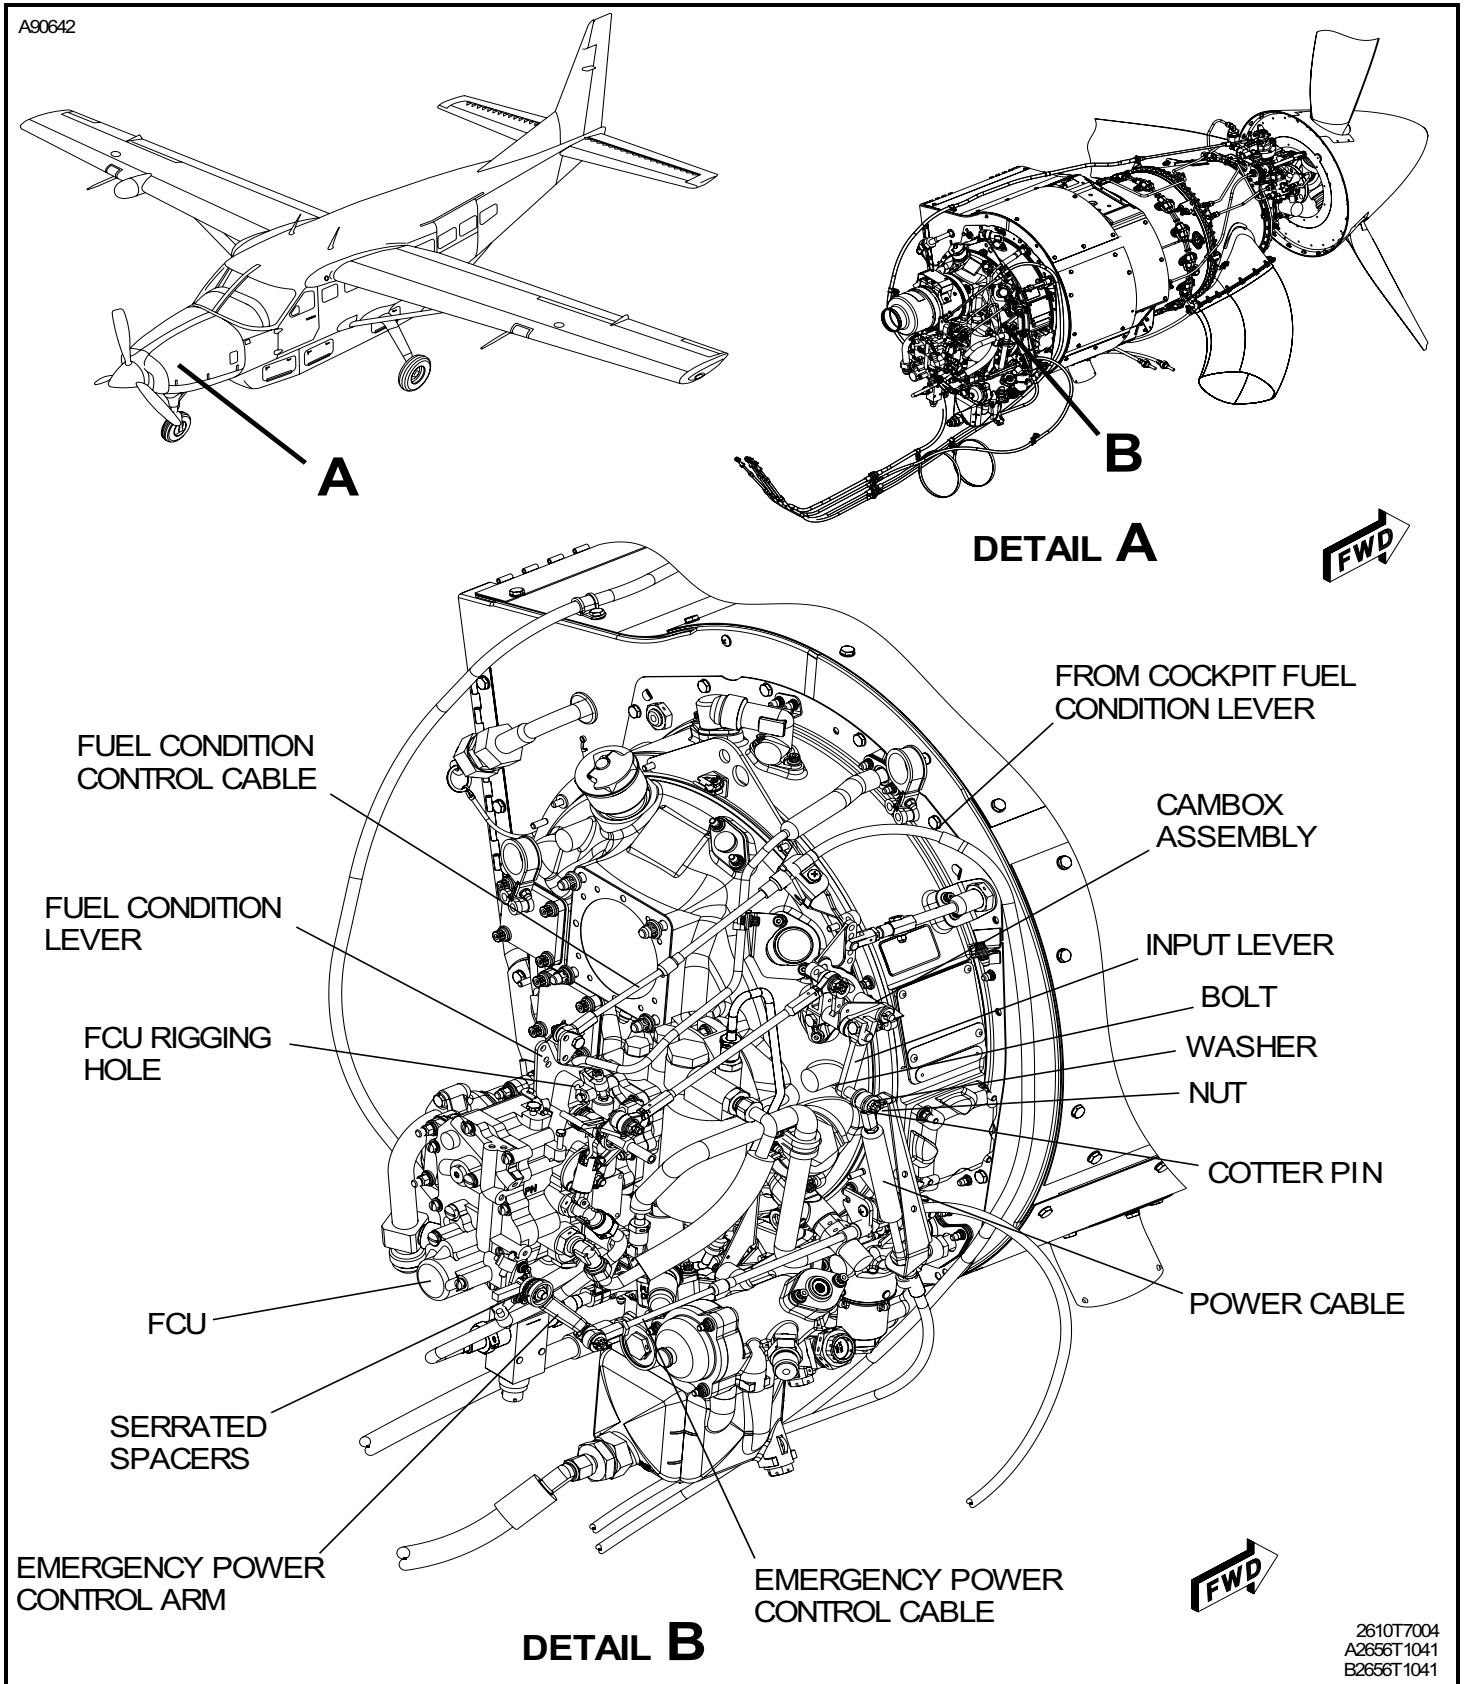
Sheet 1 : Beta Forward Cable Adjustment
